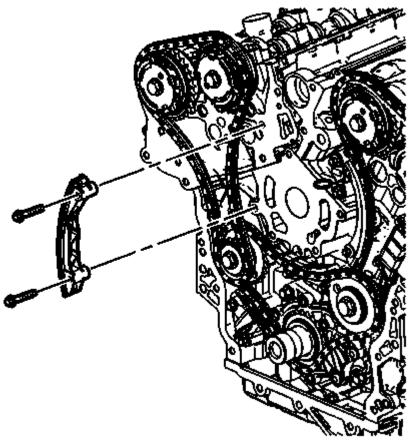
View Of Right Secondary Camshaft Drive Chain Guide & Bolts Courtesy of GENERAL MOTORS COMPANY
